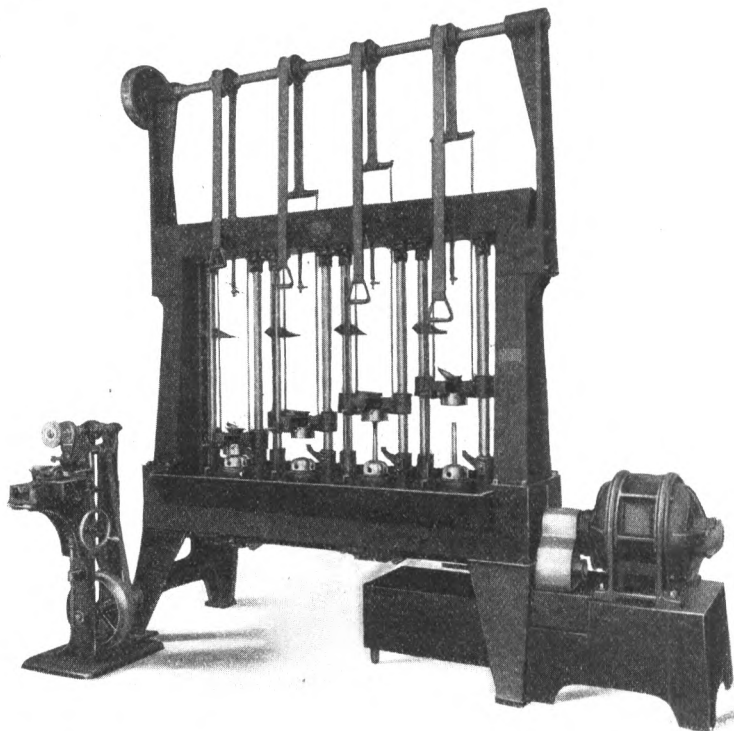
STAYBOLT-THREADING AND REDUCING MACHINE, WITH SPECIAL GRINDER FOR CUTTING TOOLS
